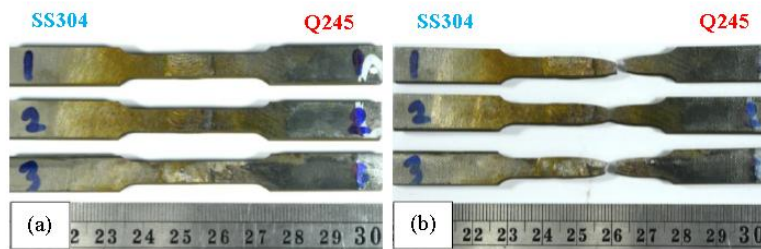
Tensile test specimen (a) before tensile testing (b) after tensile testing
